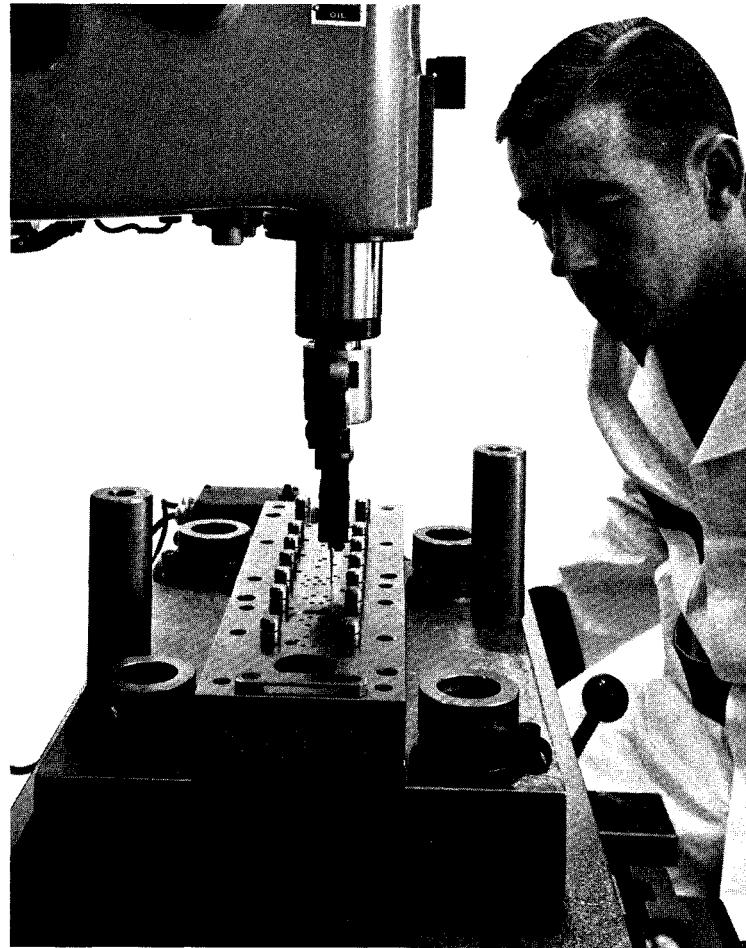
The rotary table may be used to facilitate line-up of datum surfaces or holes of workpieces for measurement by rectilinear coordinates; in such cases, rotary table accuracy is not essential.
